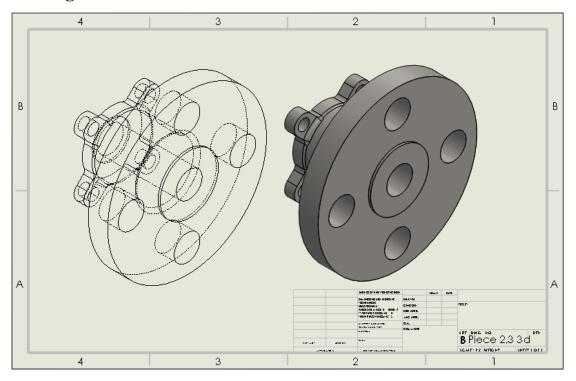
3-Dimensional Sketch of Flange Ends
